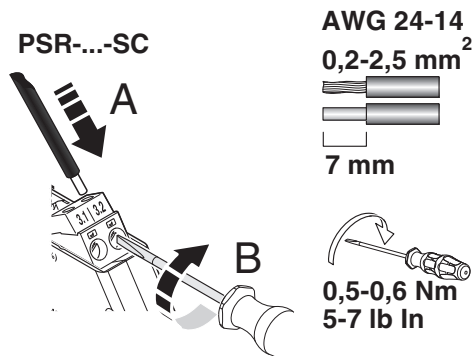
Connecting the cables for PSR-...-SC (screw terminal block)
